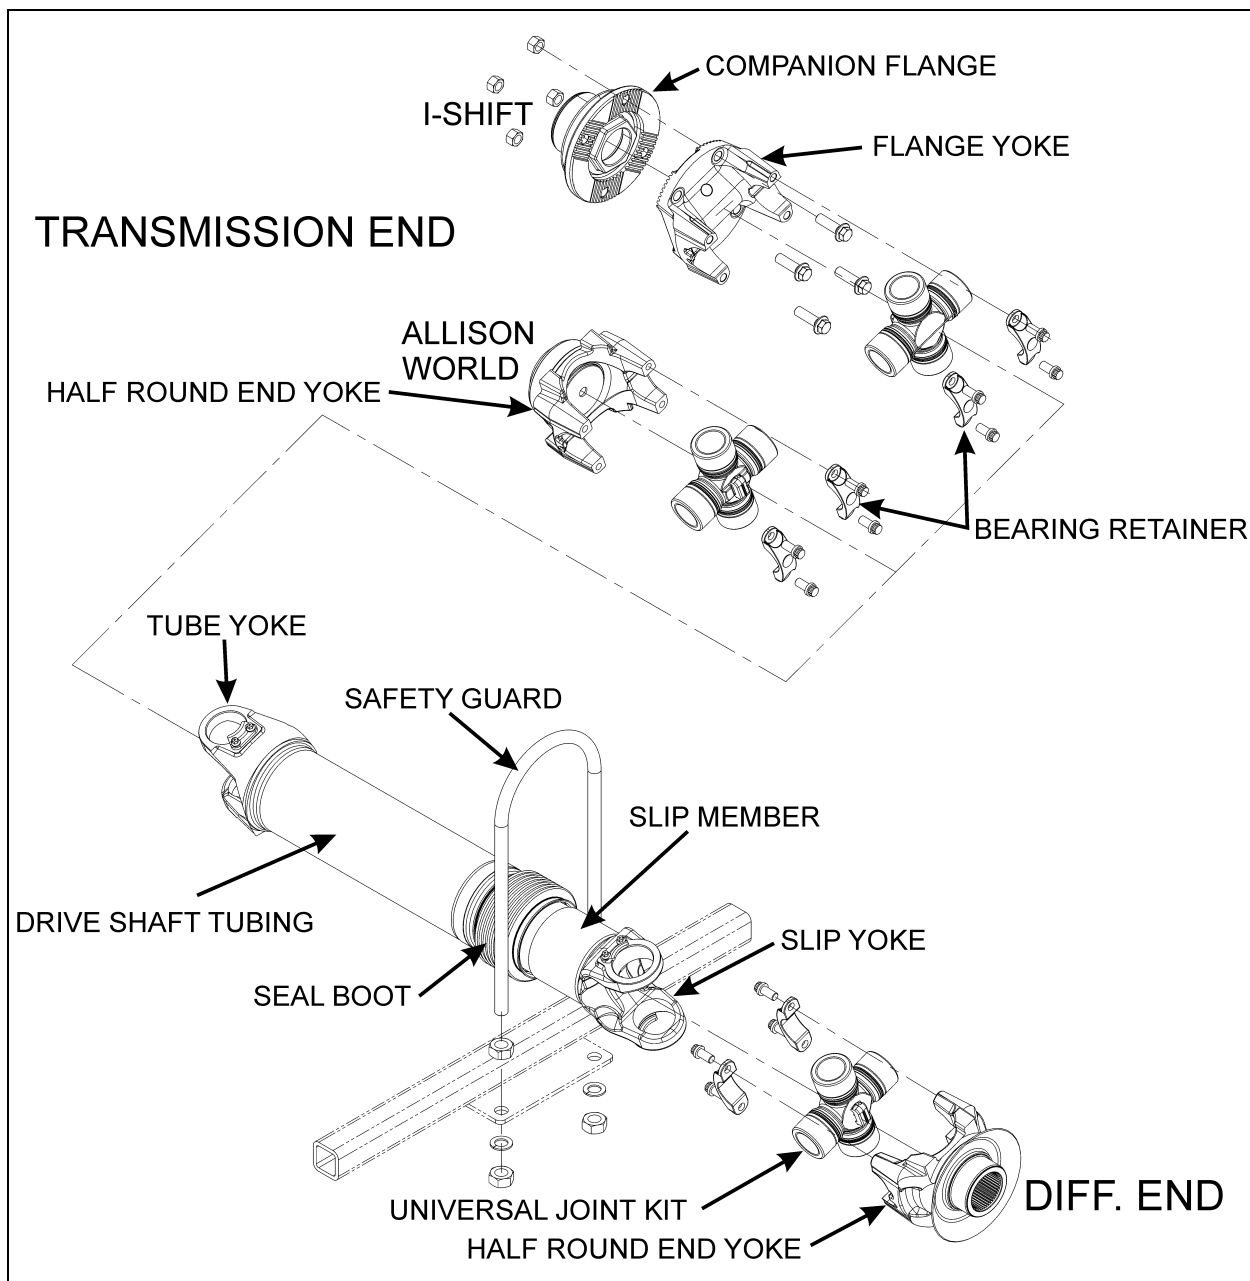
PROPELLER SHAFT ASSEMBLY
